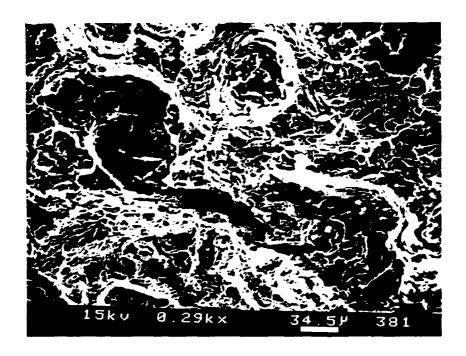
Fractograph depicting cleavage indicative of brittle fracture mode, at 290X.
